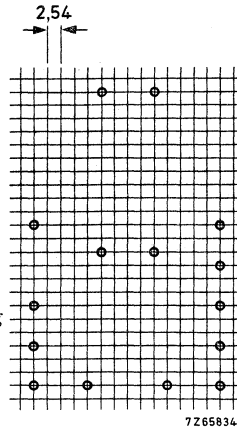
Hole pattern for mounting on a printed-wiring board (solder side)
